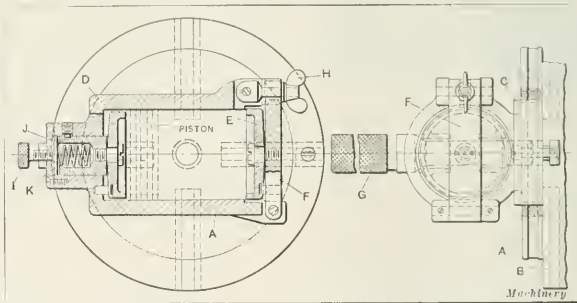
Detail View of Special Work-holding Fixture shown in Fig. 27
